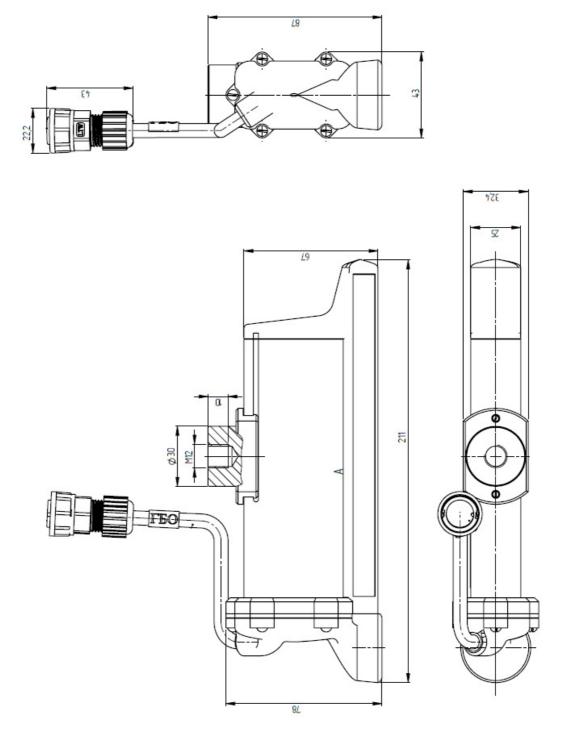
Monoblock outline drawing (version with bracket for mounting to pole d30 of KIT006 set)
